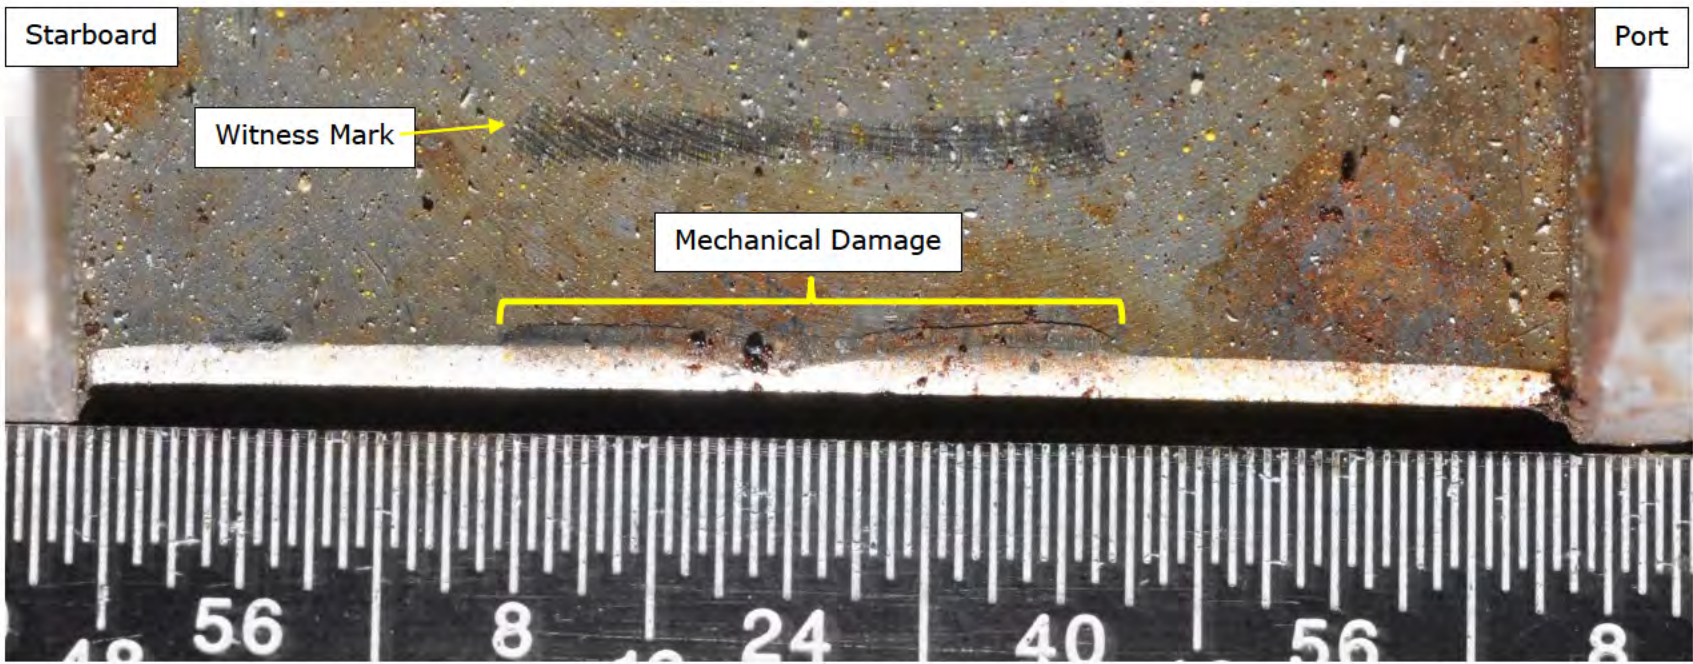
Photograph of the locking shaft from the Subject Aft Hook showing the mechanical damage on the edge between the round and the flat of the locking shaft. Ruler is in inches.
